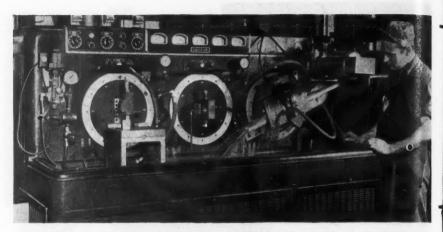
Progressive Hardening Operation on a Gear Shift Fork Shaft at Caterpillar Tractor Plant (Courtesy Ohio Crankshaft Co.)
